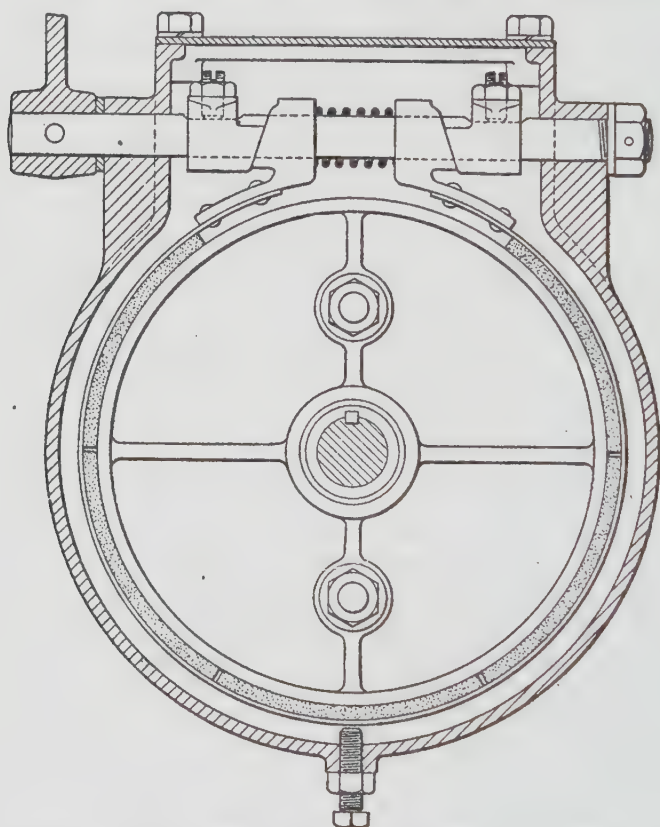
BRAKE CONSTRUCTION FOR PLANETARY GEAR.
